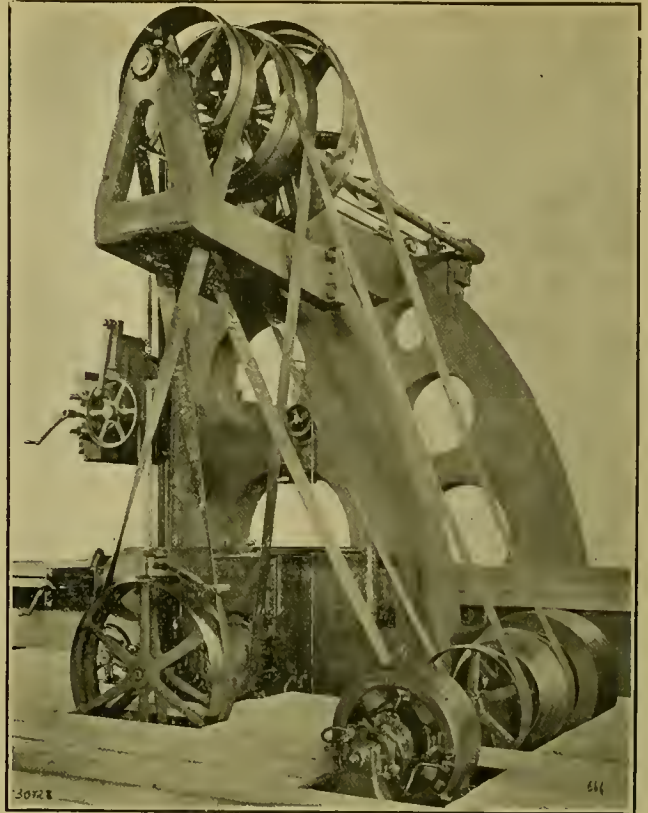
AN INTERESTING MOTOR DRIVE UPON A HEAVY BETTS PLANER, USING AN UNUSUALLY HEAVY FLYWHEEL. CROCKER-WHEELER MOTOR.
